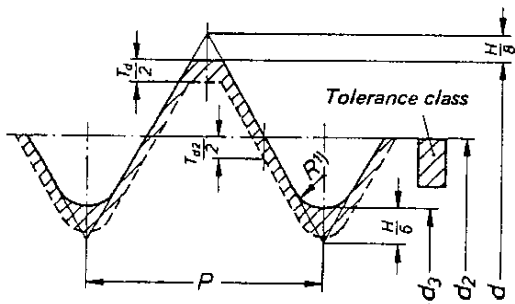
Bolt thread with fundamental deviation 0 (tolerance position h)
